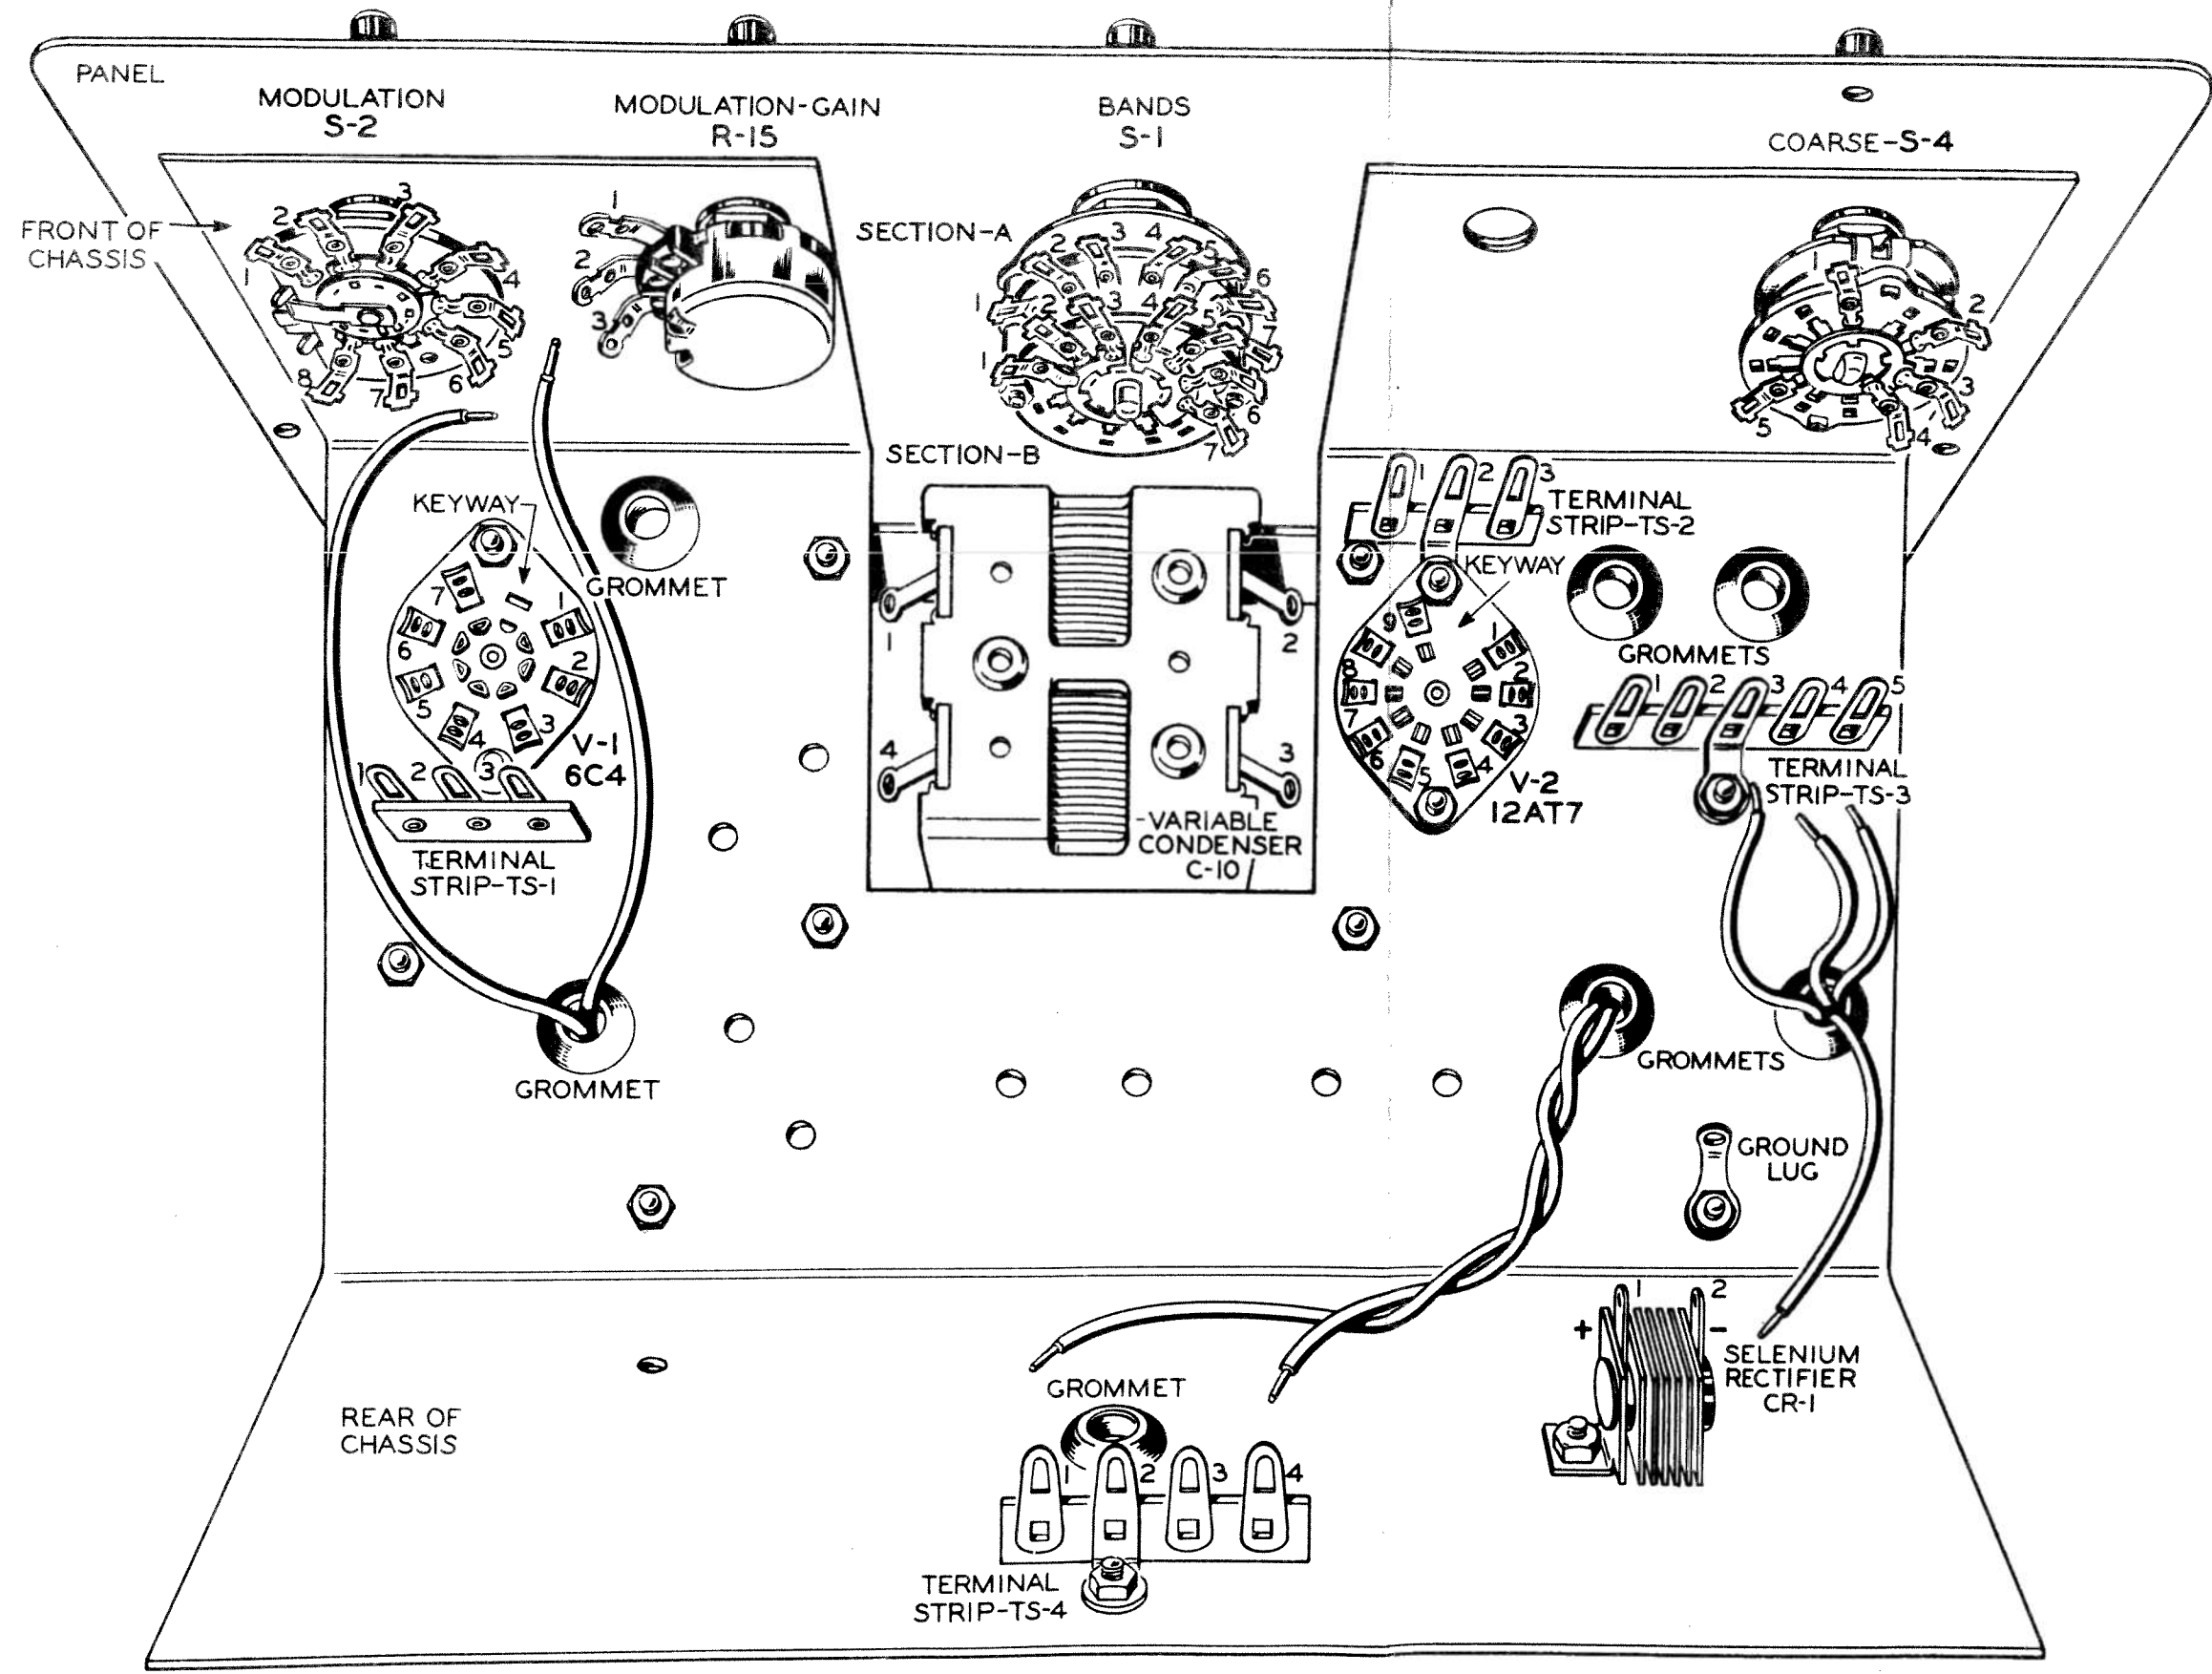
HOW TO MOUNT THE PARTS INSIDE THE CHASSIS.
